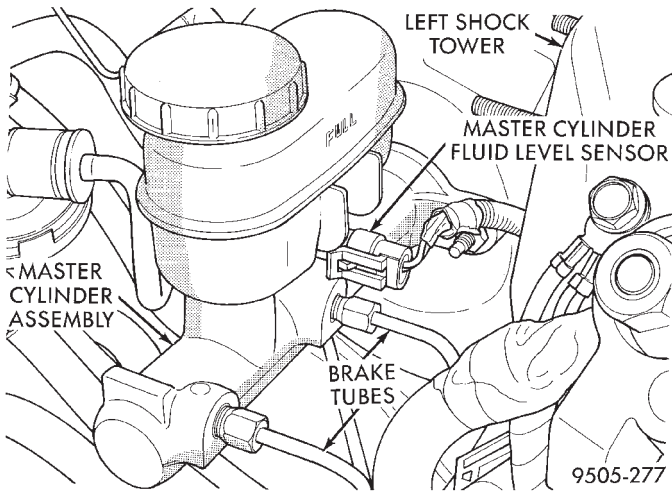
Master Cylinder Brake Fluid Level Sensor
